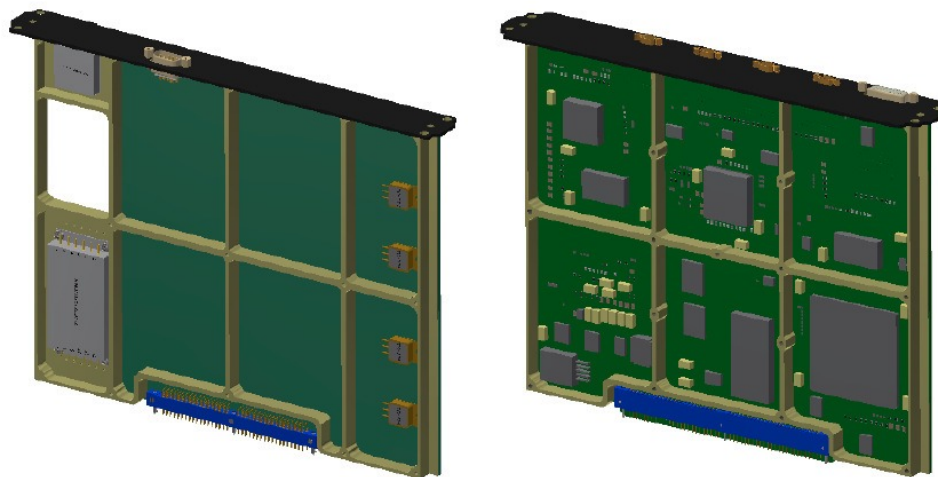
PSU and CPU/MMU boards with their mechanical frames for stiffness improving.
